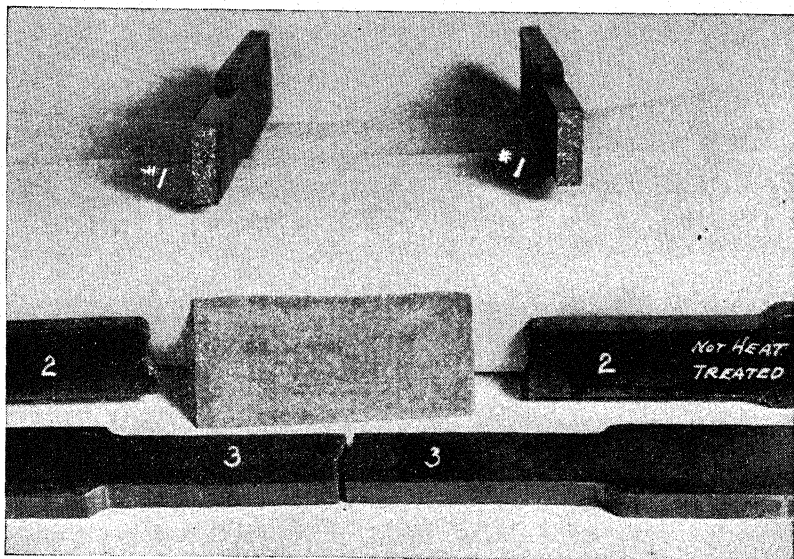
Sample made by former method failed at heat-treated welds.
